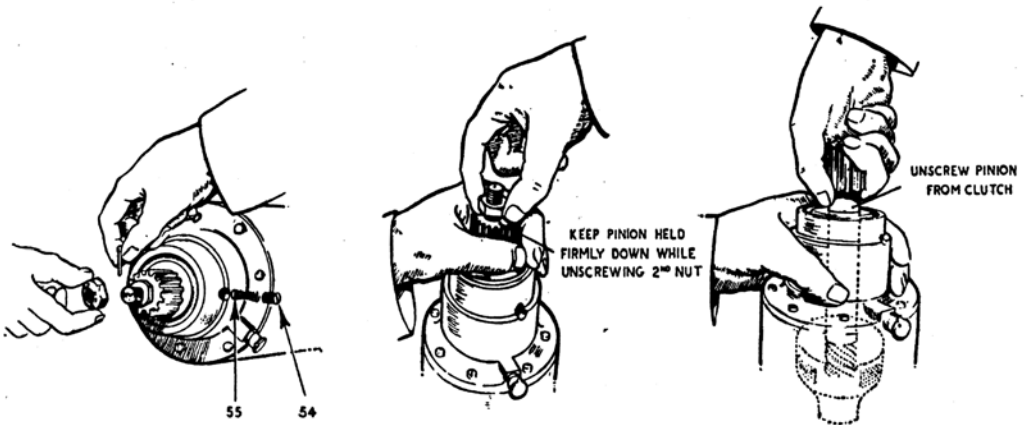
Method of Removing Starter Pinion without Dismantling Starter Motor.
